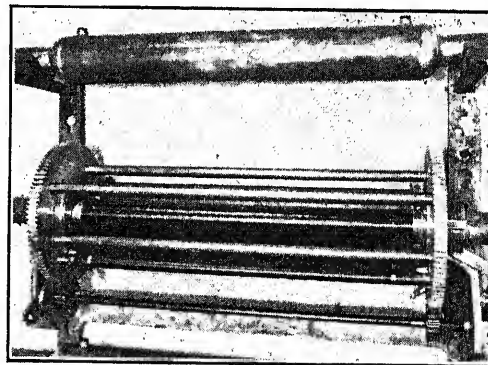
SHOWING CABLE AFTER STEPS HAVE BEEN FILLED WITH PAPER AND FULL-WIDTH PAPER WRAPPED ON
